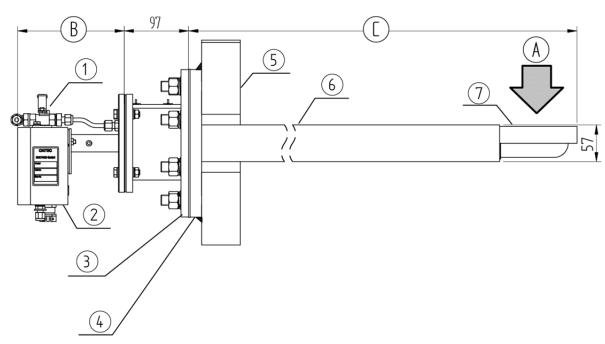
Dimensions of the ZIRKOR200, probe lengths 1 - 2 (dimensions in mm)
